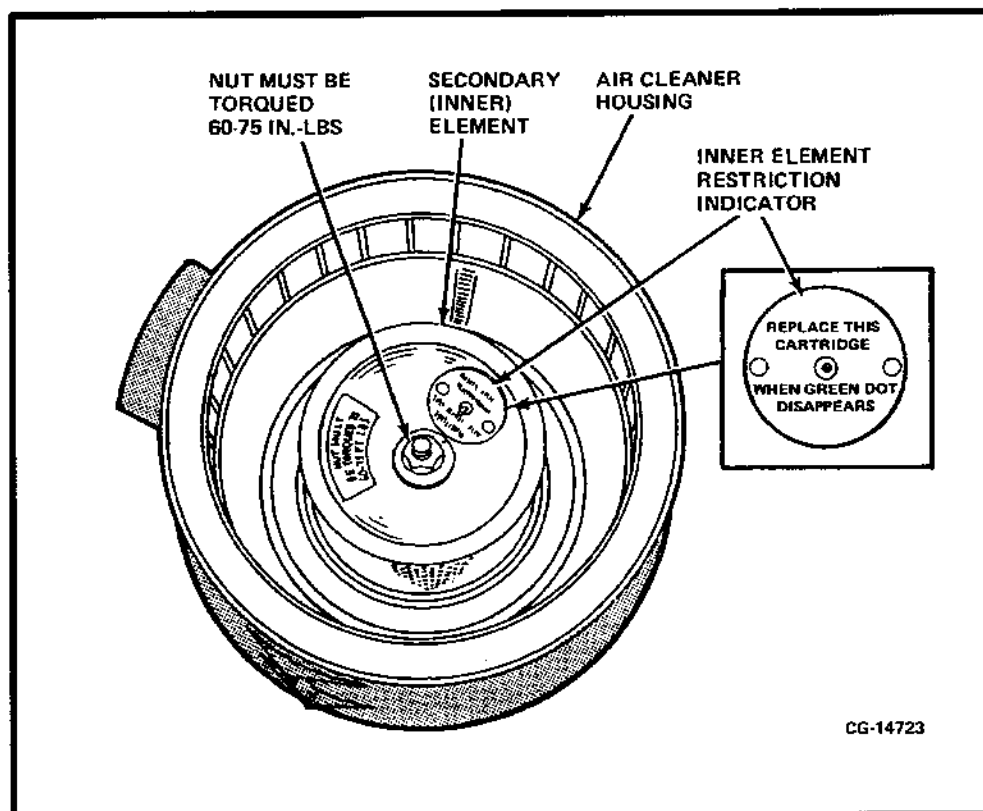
Top View of Dual Element Air Cleaner with Indicator in End Cap
